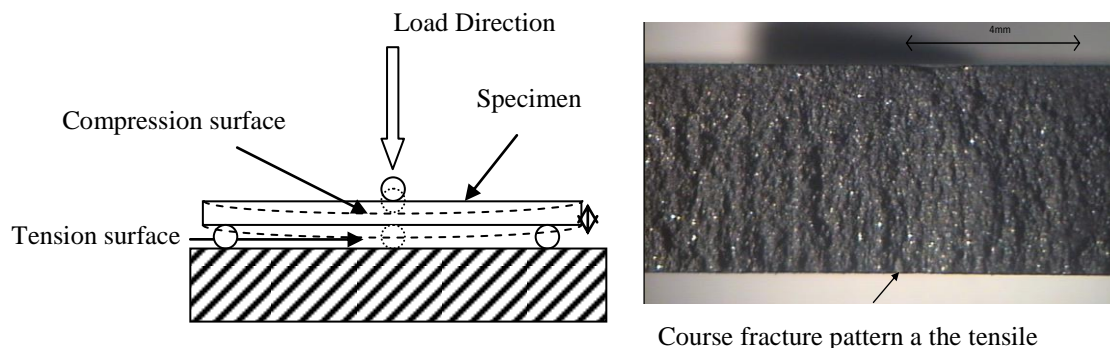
(A) Schematic diagram demonstrates the tensile and the compression surface site. (B) Optical image shows the texture pattern of fracture surface at tensile and compression site.
